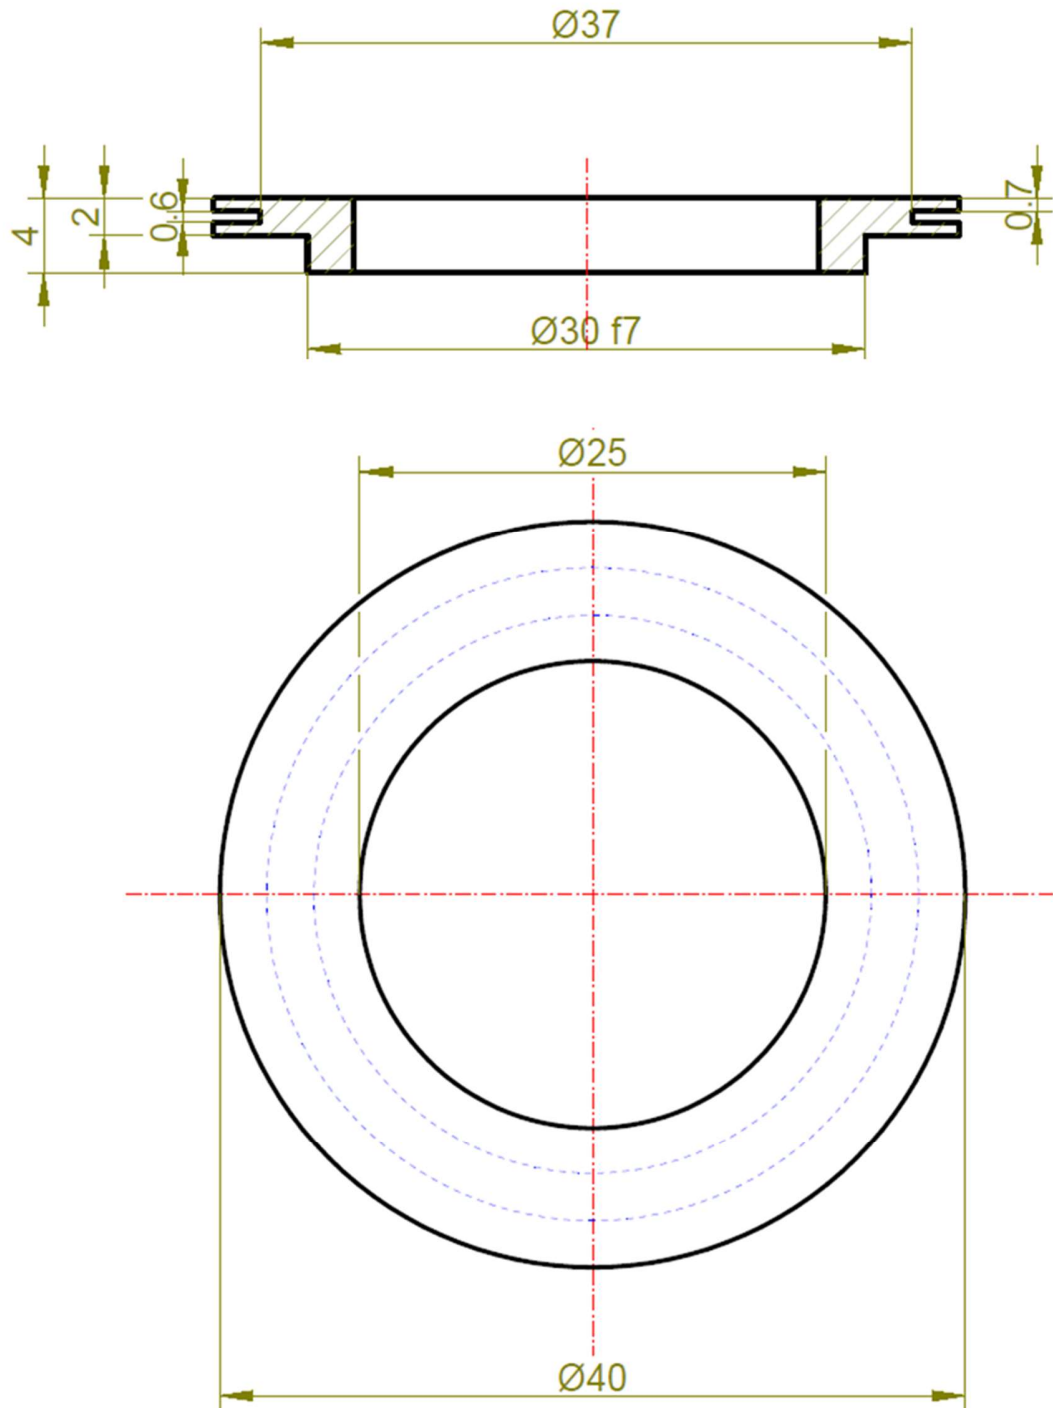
Technical drawing of the gate ring. All dimensions in mm
